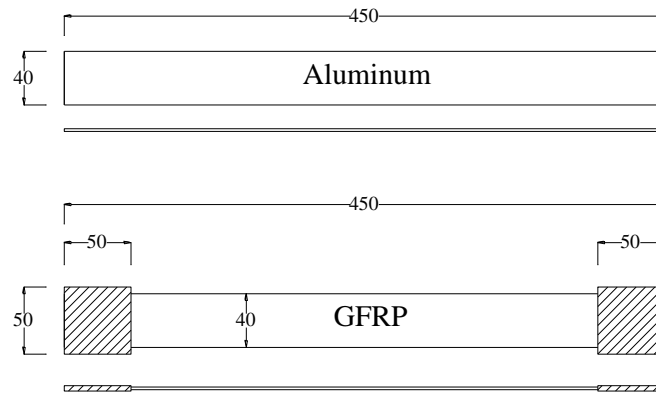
Details of the tensile specimens (dimensions in mm).
